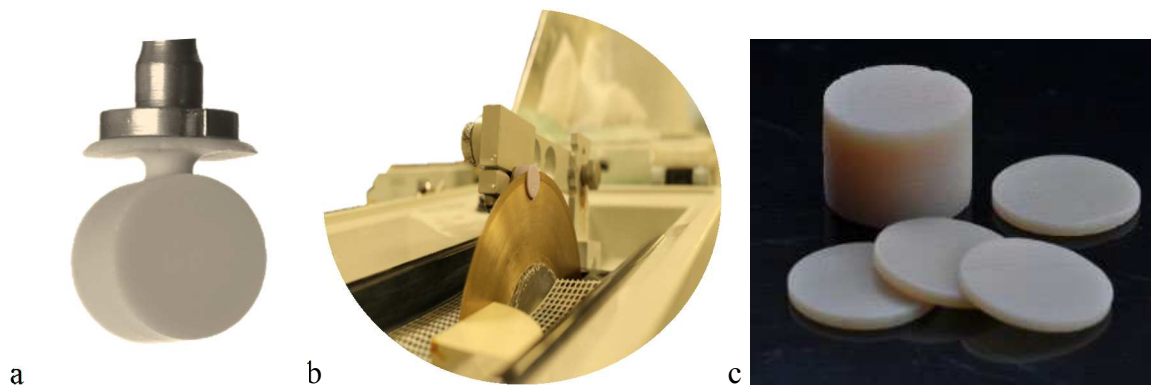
Specimen Preparation a) Milled Block b) Specimen placed in saw c) Disc Shaped specimen
